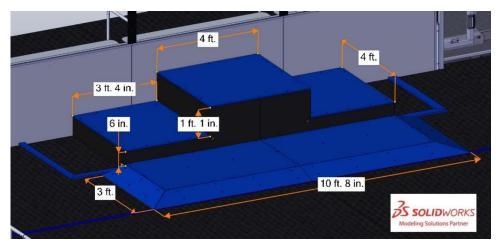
Blue HAB PLATFORM with major dimensions.
